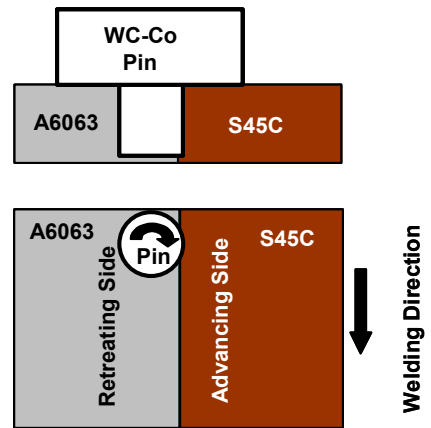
Dissimilar welding of A6063 Al and S45C steel.
